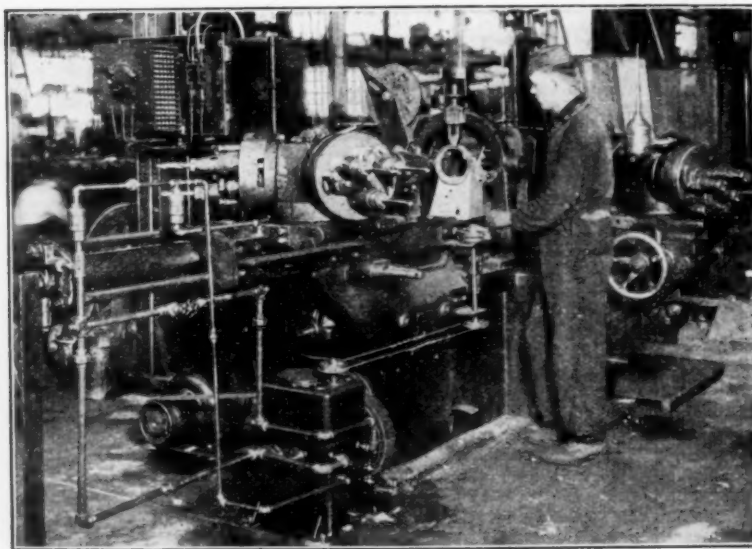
SPECIAL TURRET MACHINE EQUIPPED WITH HYDRAULIC FEED
